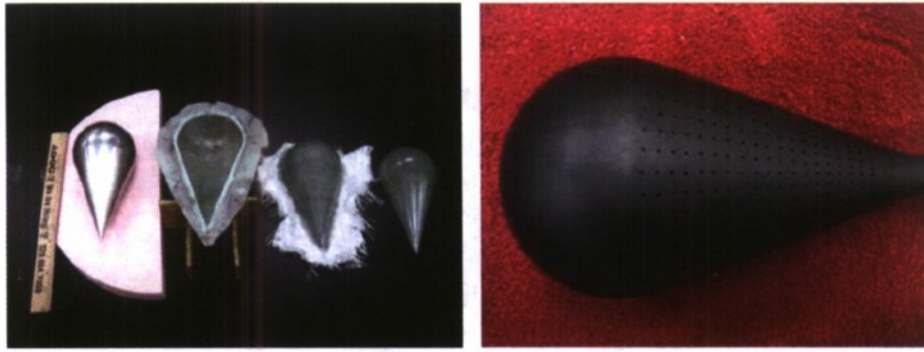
Manufacturing of displacement body from aluminum positive body, negative fiberglass mold and positive half-shell (left). The final displacement body with boundary layer suction holes is shown on the right.
